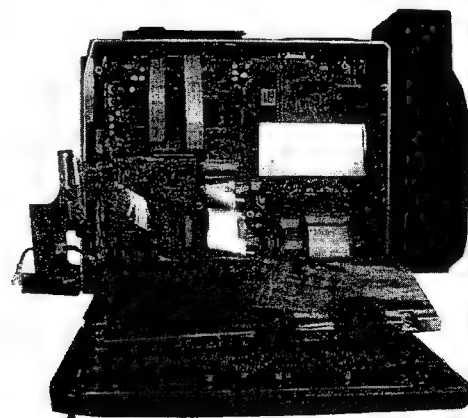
(4) Diagnosis of the 50P CONN. board
